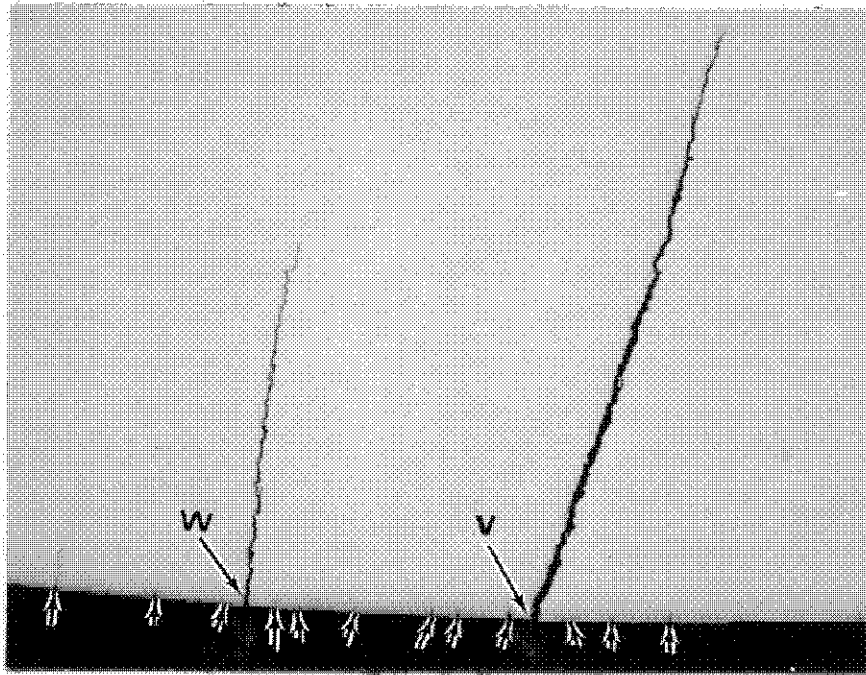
Sectional view on cutting line "u" in figure 11 location "h" with cracks "v" and "w" indicated. (As-polished, 20X)
